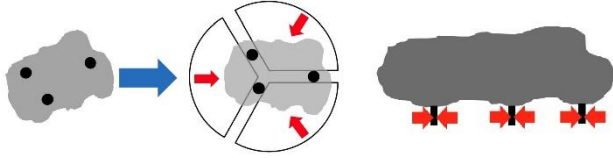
Novel pin-clamping. Workpiece visible from above (left) and the side (right).
